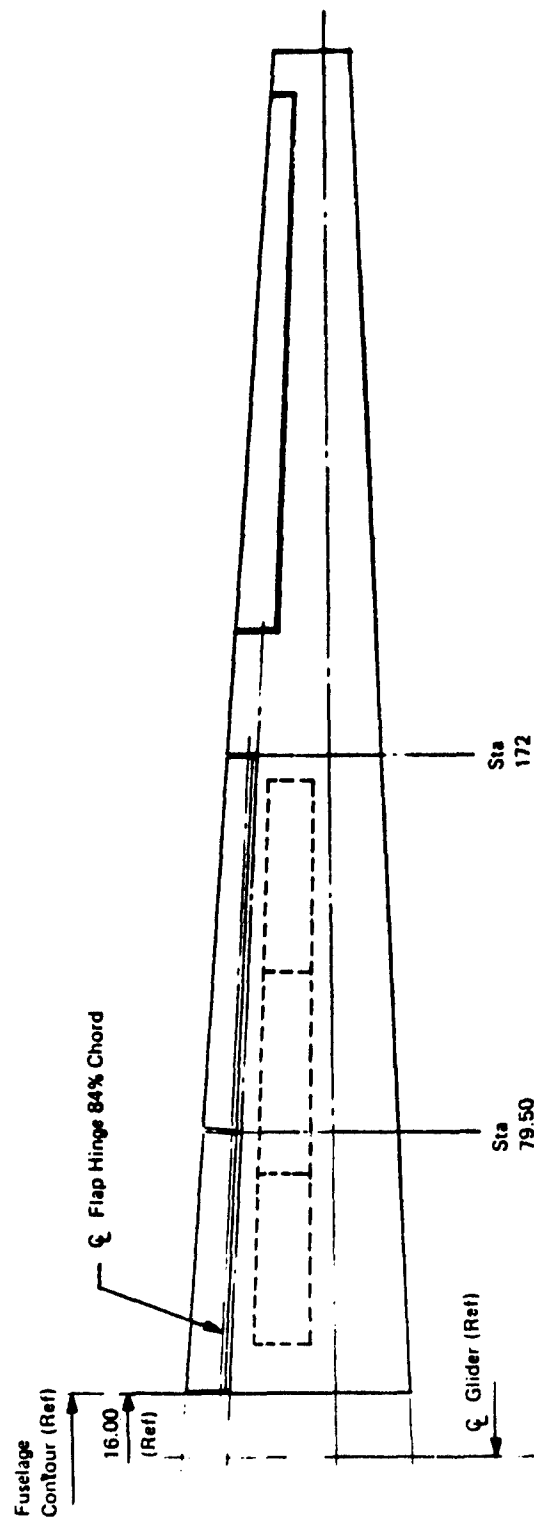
Planform Layout of Spanwise Duct and Trailing Edge Flap
